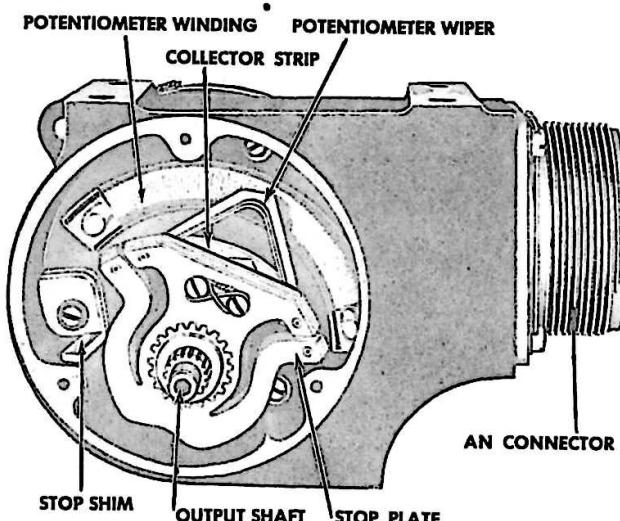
View of Balancing Potentiometer in Waste-Gate Motor (Stop Shim Is Not Used in G303AY2CA2 Motors)
